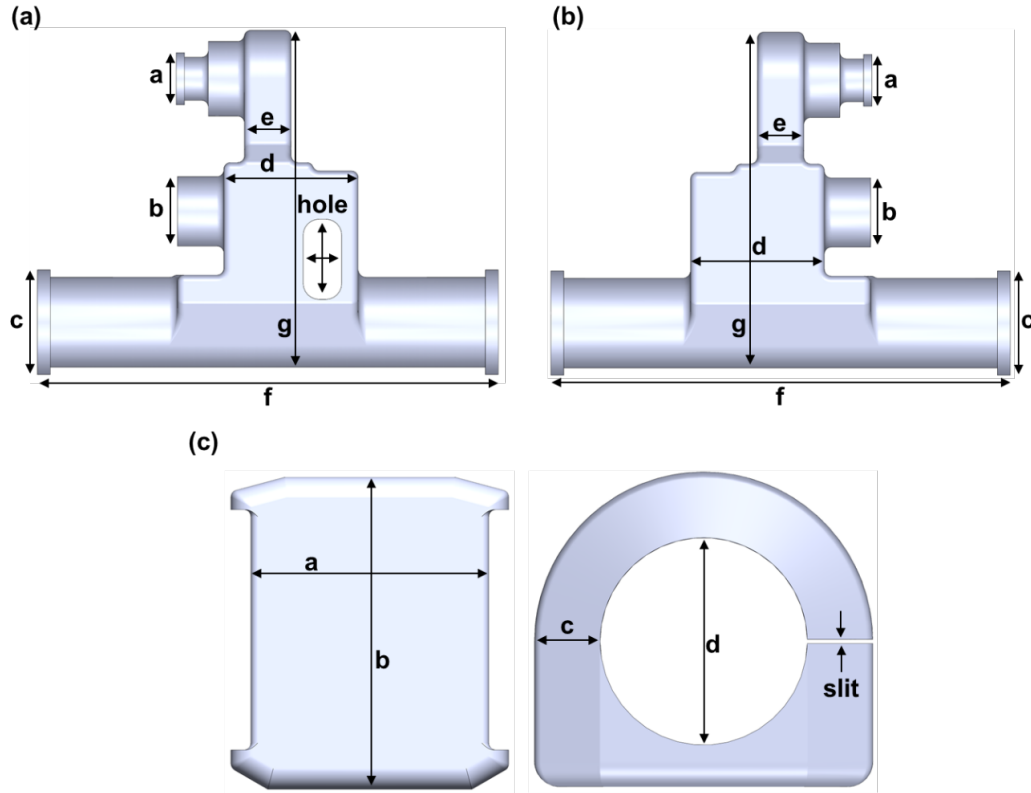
Labeled dimensions of the bus bar cover assembly reported in Table 1 for (a) Part 1 of the bus bar cover assembly, (b) Part 2 of the bus bar cover assembly, and (c) the resilient mount.
